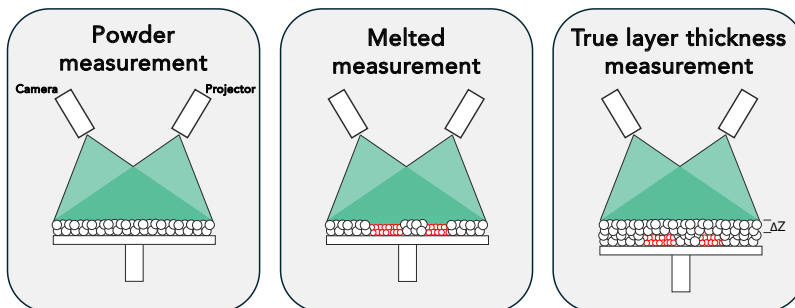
Fringe Inspection patented structured light inspection process takes three measurements per layer, as shown above (Courtesy Phase3D)
